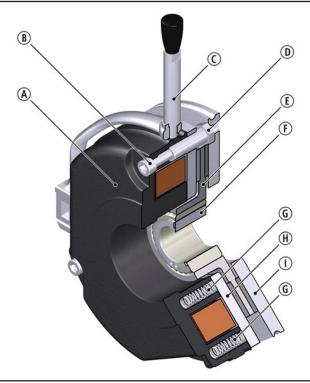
Design of the INTORQ BFK458 spring-applied brake: Basic module N (complete stator) + rotor + hub + flange
